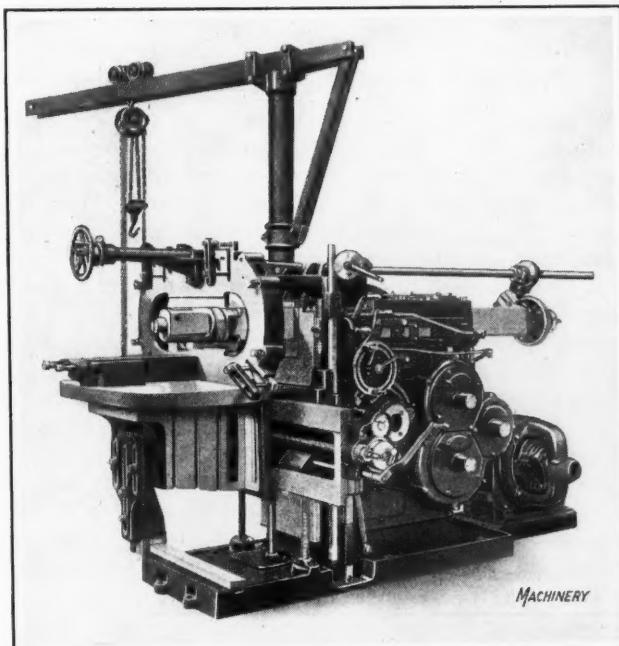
Heavy-duty Draw-cut Railroad Shaper which is a Product of the Morton Mfg. Co.
